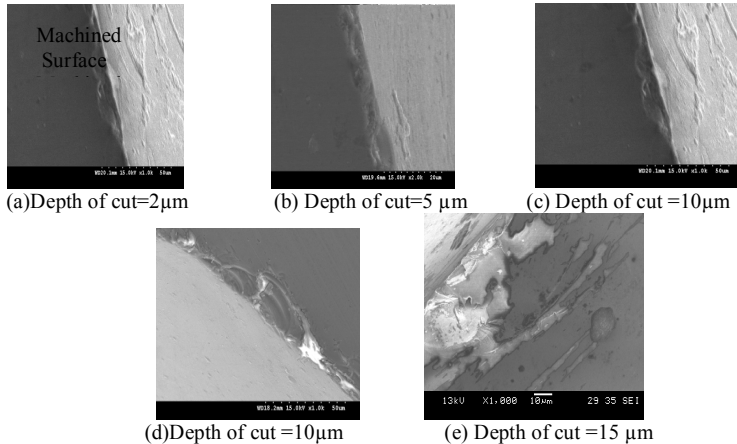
Sub-surface damage of Bk7 glass during micro-grinding varying depth of cut using spindle speed of 2500 rpm.
